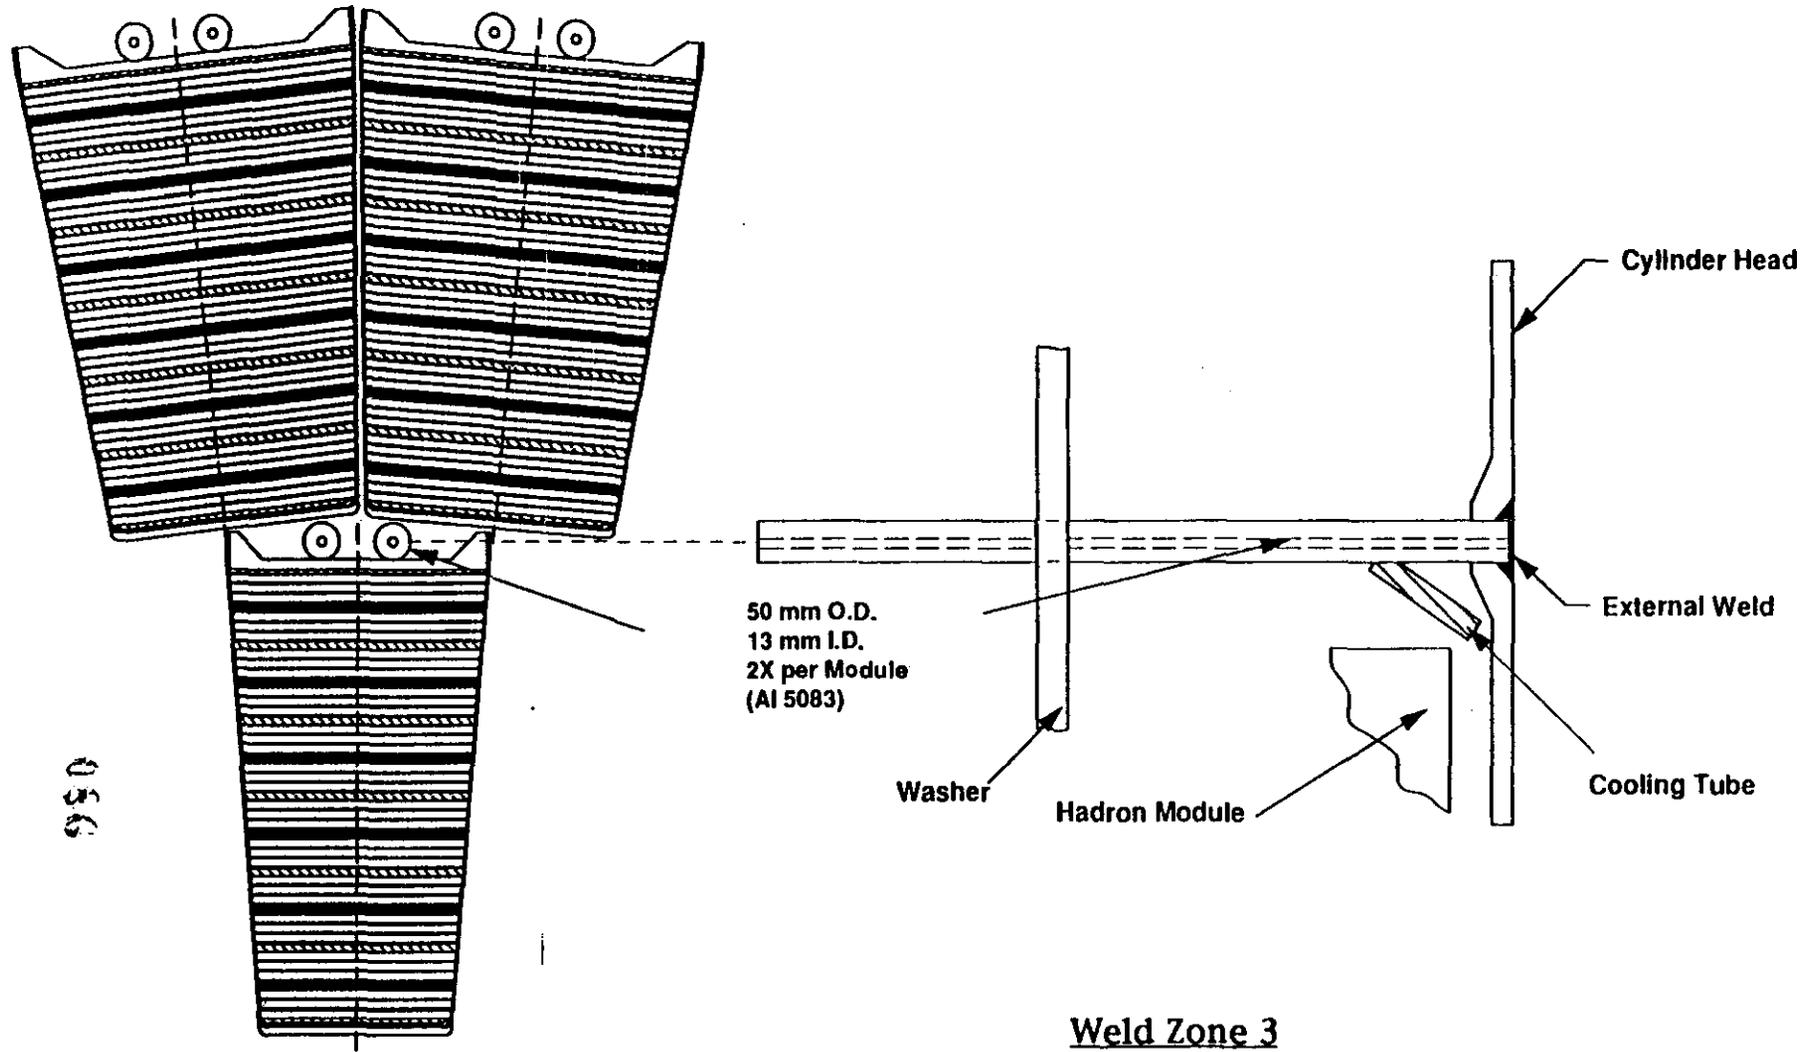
Cooling Tube Hadron Module Stay Concept
